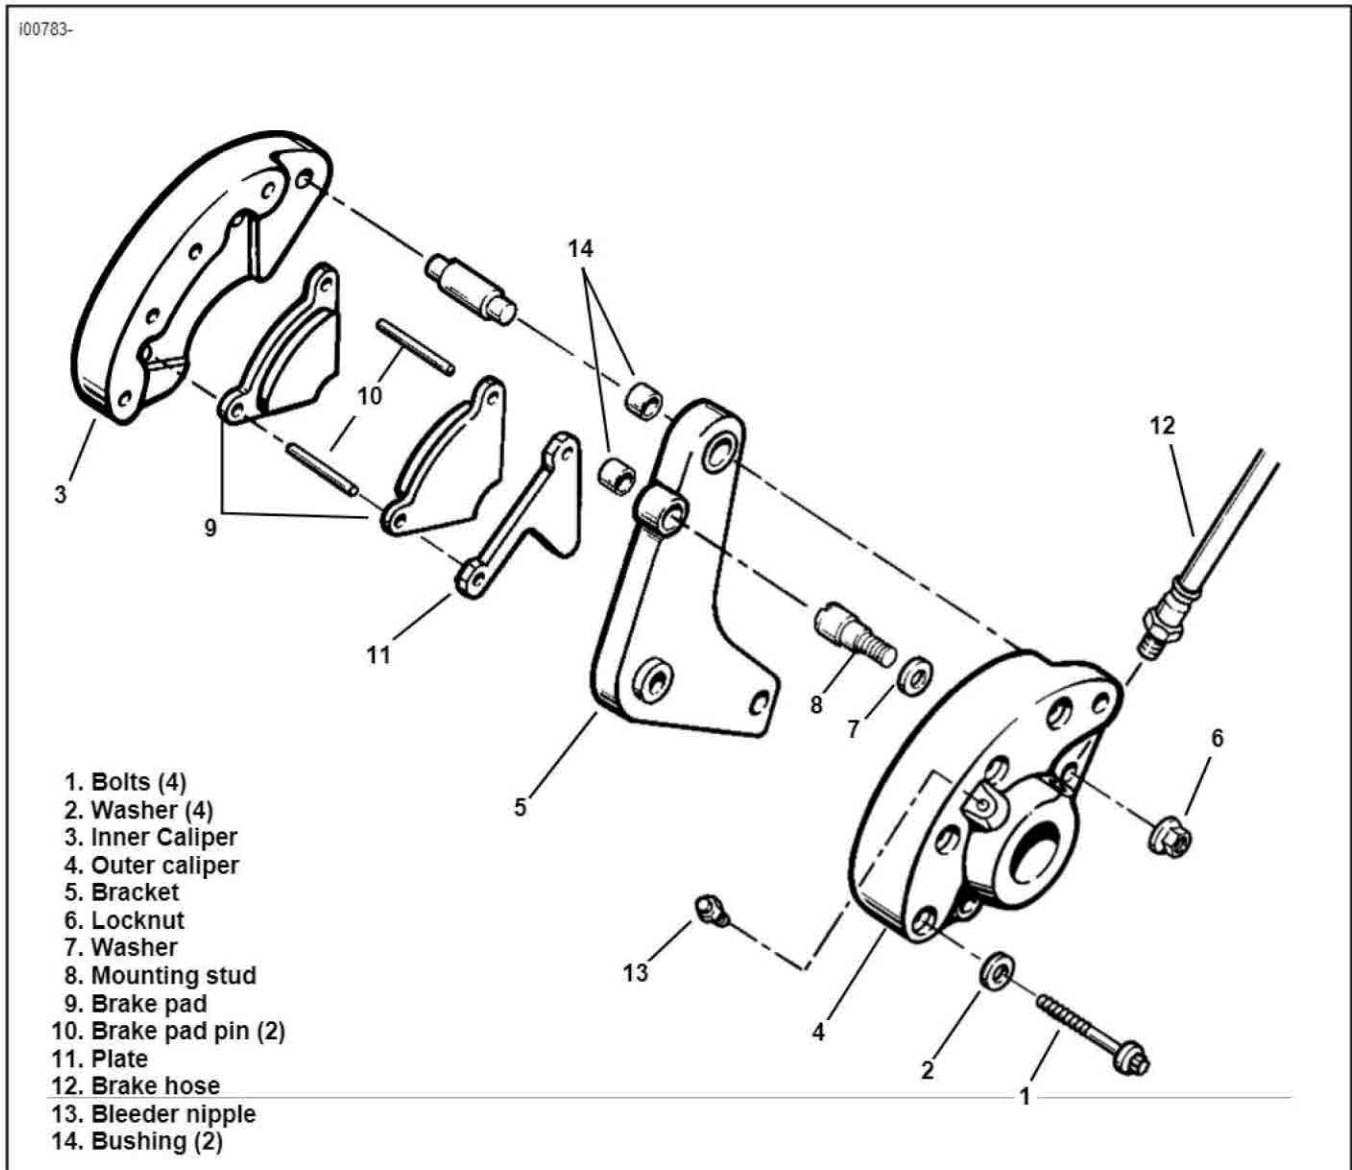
Rear Brake Caliper -- 1978<sup>1/2</sup> - 1980 FL/FX Models
